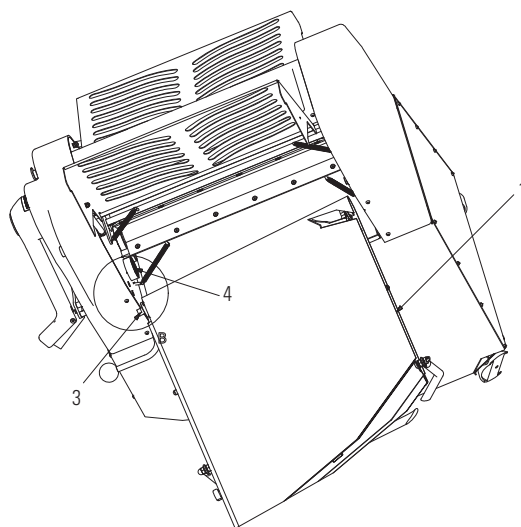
ASSEMBLY/DISASSEMBLY OF THE CONVEYORS - SF SERIES (FIG. 10-11)
